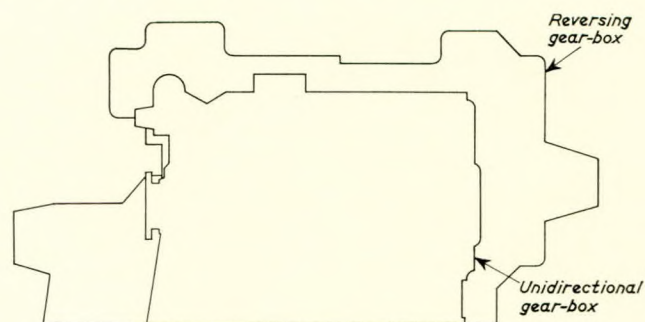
Illustration of size difference for a destroyer cogog gearbox design
